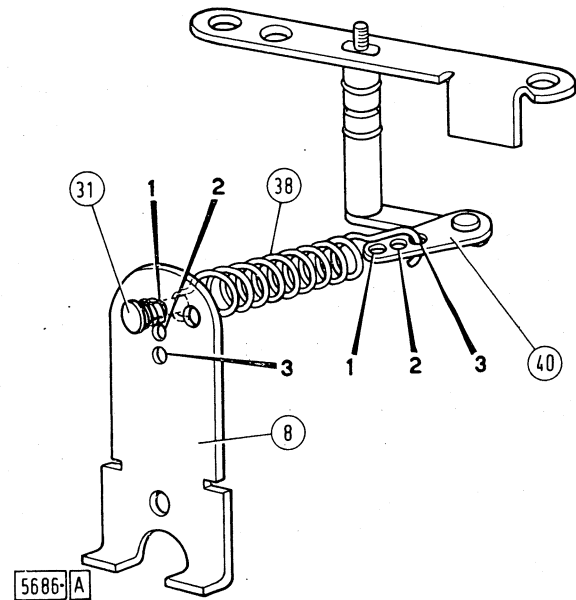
Attaching holes of control spring (38) in throttle arm (40) and control arm (8) through the spring guide (31).
